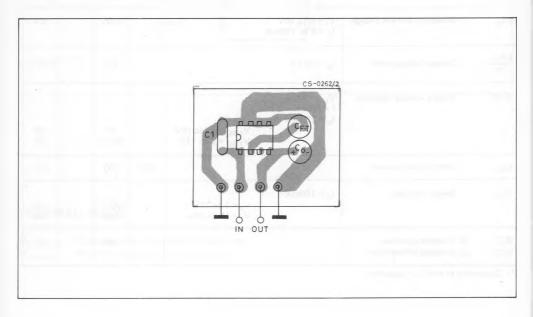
P.C. board and component layout of fig. 1 (1:1 scale)
